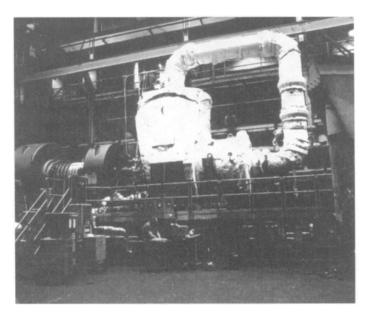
Expander during hot mechanical running test in Jeannette, Pennsylvania facility. Four inches (102 mm) of insulation is secured to the casing with refractory-type anchors welded to the casing. Final site treatment includes a layer of 1.1 lb/ft² (5 kg/m²) lead foil for acoustic purposes and two outer coats of open-weave glass cloth and emulsion reinforcement, for an aluminum gray color.
